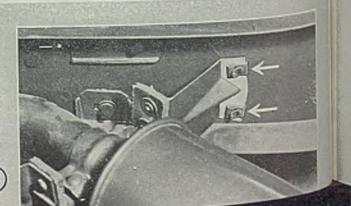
"U" nut slipped over bracket permits blind assembly of oven door, prevents damage to porcelain enamel surfaces by affording resilient mounting, supplies "float" required to accommodate variations in making up the assembly
